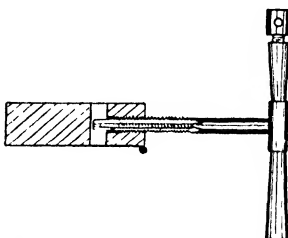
The hole is not deep enough to allow the tap to cut a full thread
